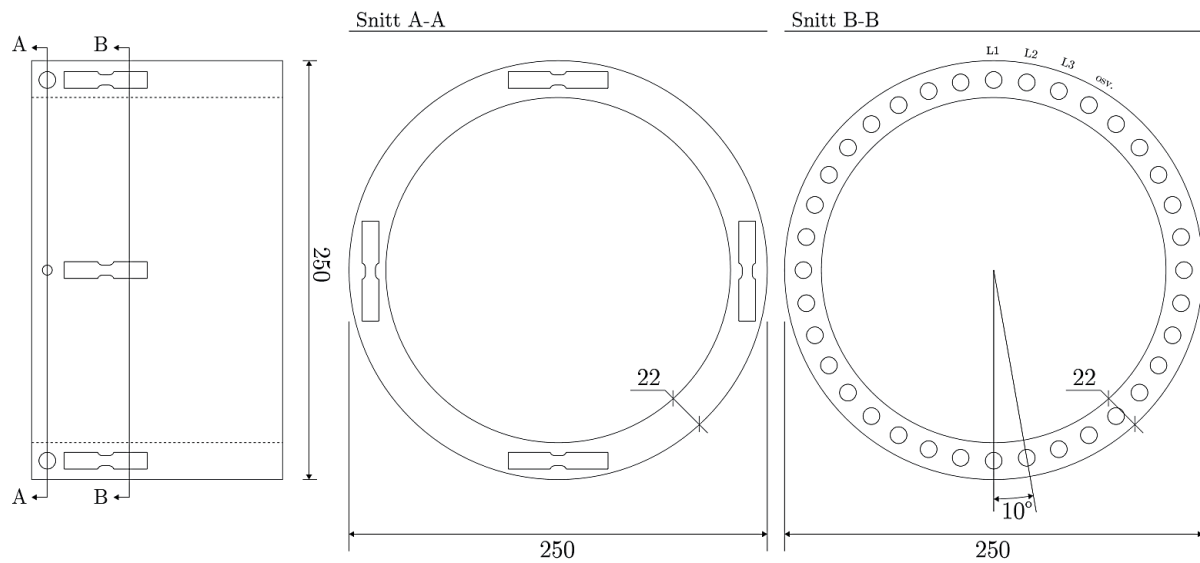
Polypropylene pipe dimensions. Test specimen are outlined according to their mill direction. Circumferential mill direction is illustrated in cross-section view A-A and longitudinal is illustrated in view B-B.
